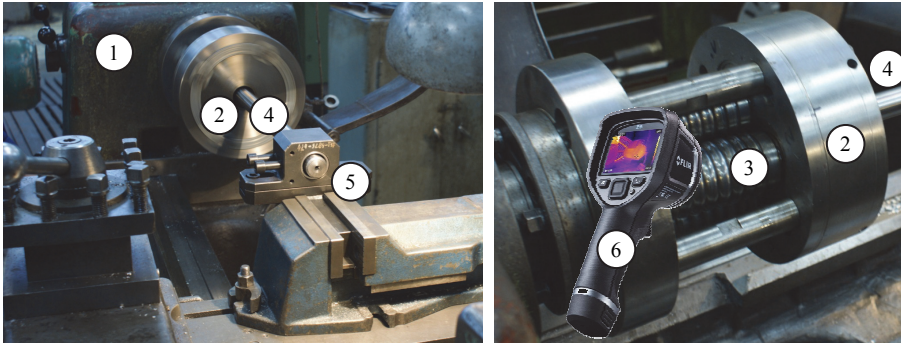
Rolling system: 1 – conventional lathe, 2 – angular thread rolling head, 3 – rolling rolls, 4 – workpiece 5 – handle the workpieces in vice, 6 – manual thermal imaging camera Flir
